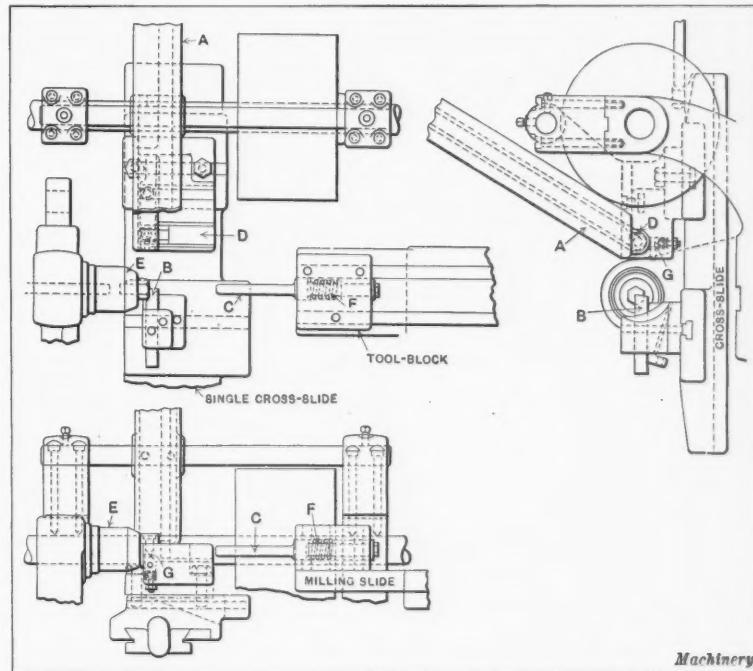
Mechanism of the Feeding Magazine shown on the Machine in Fig. 2
